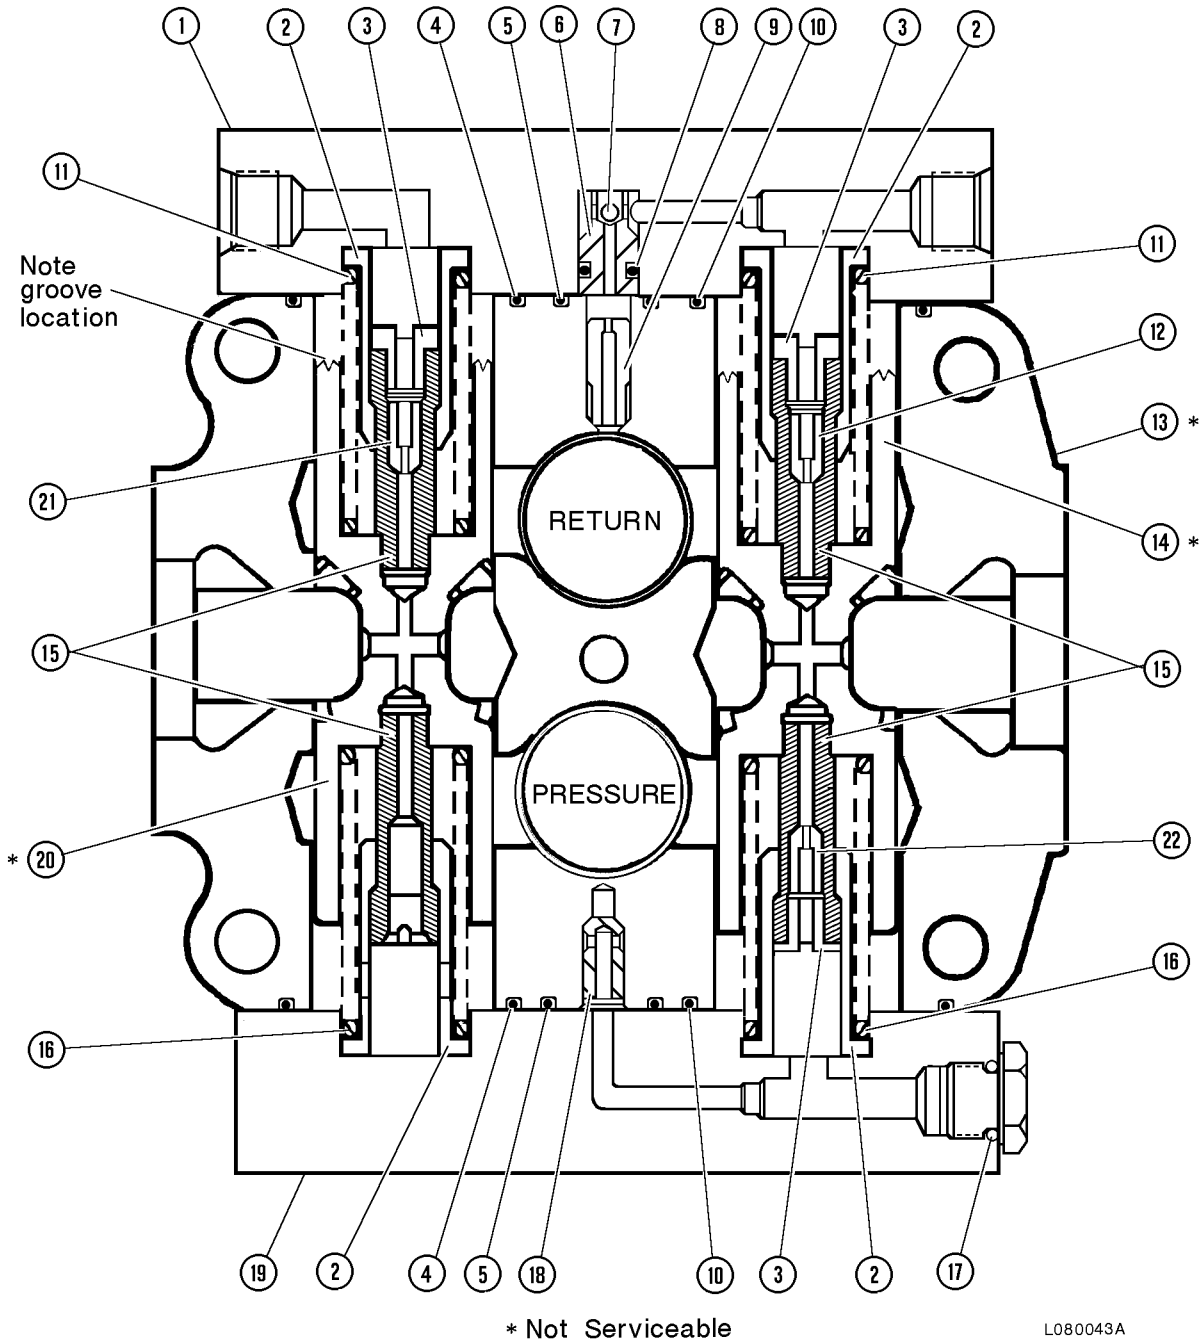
WORK PORTS SPOOL SECTION ASSEMBLY
